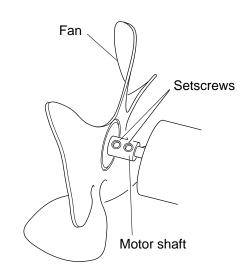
Fan, Motor Shaft, and Setscrew Locations
